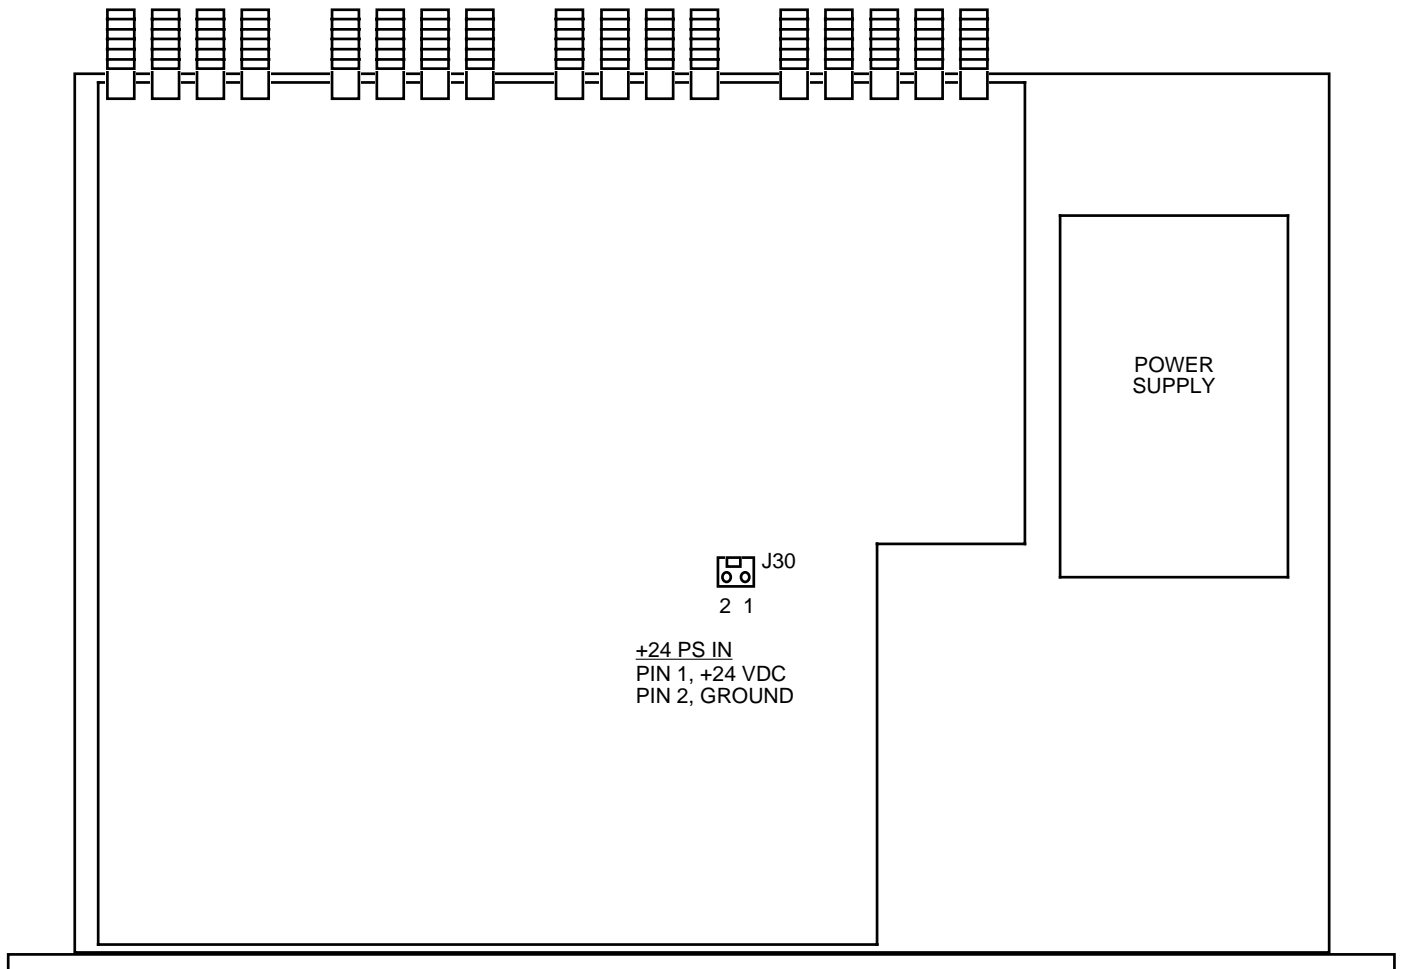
1584-116S MECHANICAL ASSEMBLY
